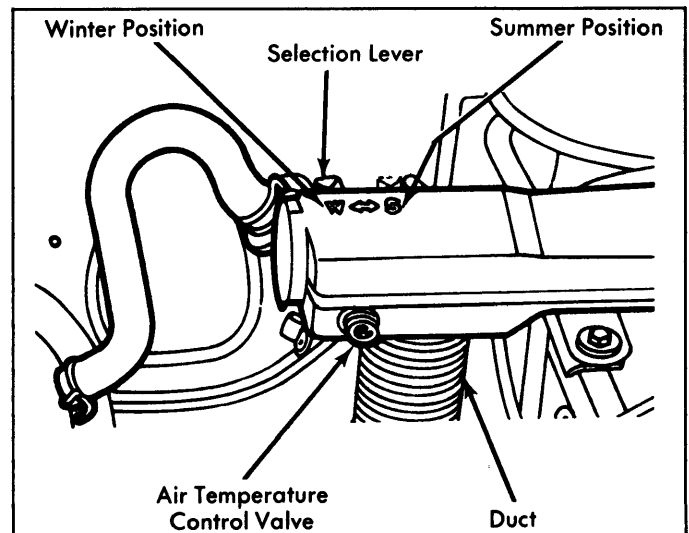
Thermostatic Air Cleaner Assembly (Manual)
